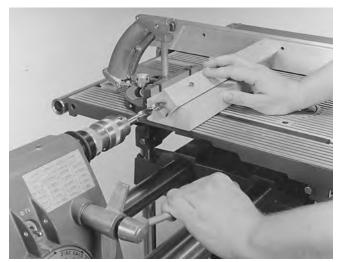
The V-block can also be used to position a square workpiece for concentric boring.
